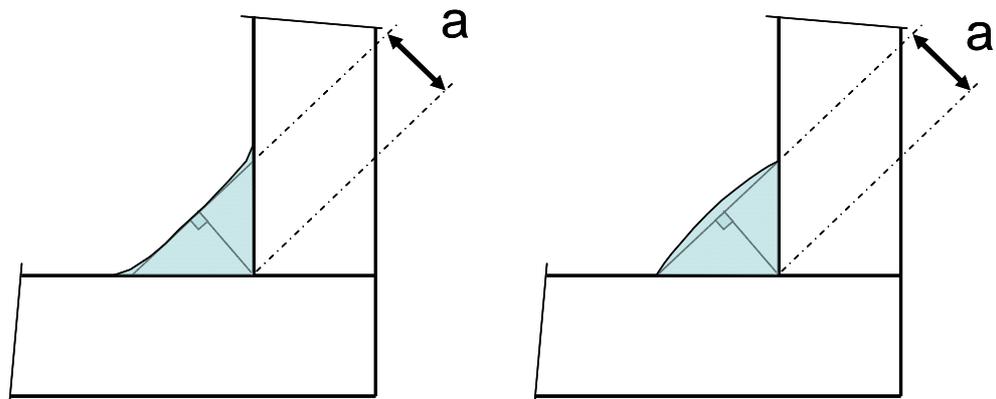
Effective Throat Dimension 'a' for concave and Convex Fillet Welds
